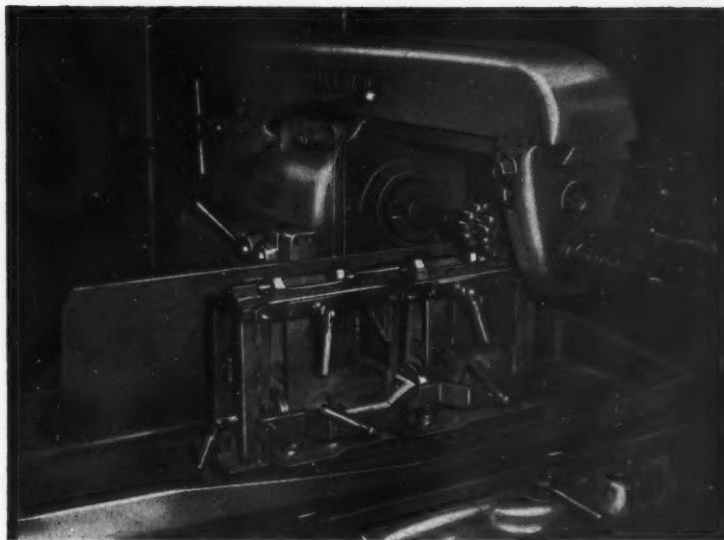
Flat faces at three different levels on the needle-bar end of the arm casting are milled, on two castings at one setting, with this set-up on an Osaka Kiko machine
